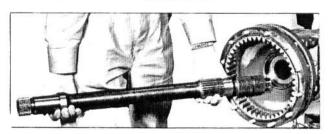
Axle Shaft Removal or Installation (Used W/Narrow Ring Gear)
